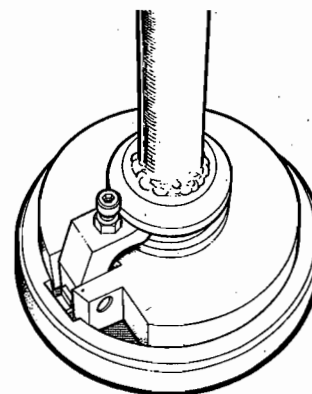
SETTING CUTTING DEPTH USING RING GAUGE
